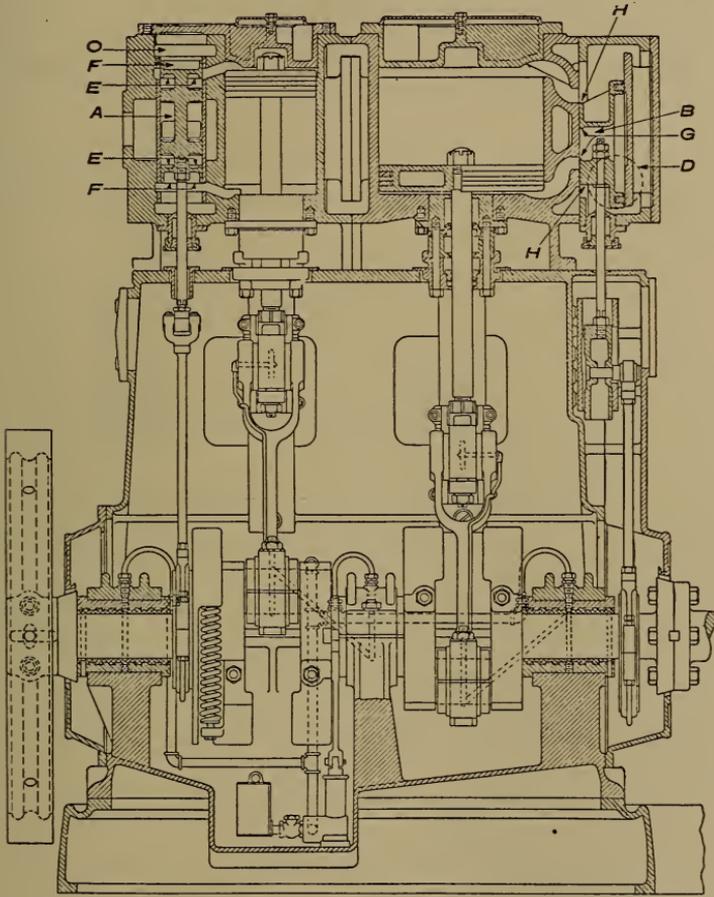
Vertical Section of Engine. Form H-2. Gen. Elec. Co.
